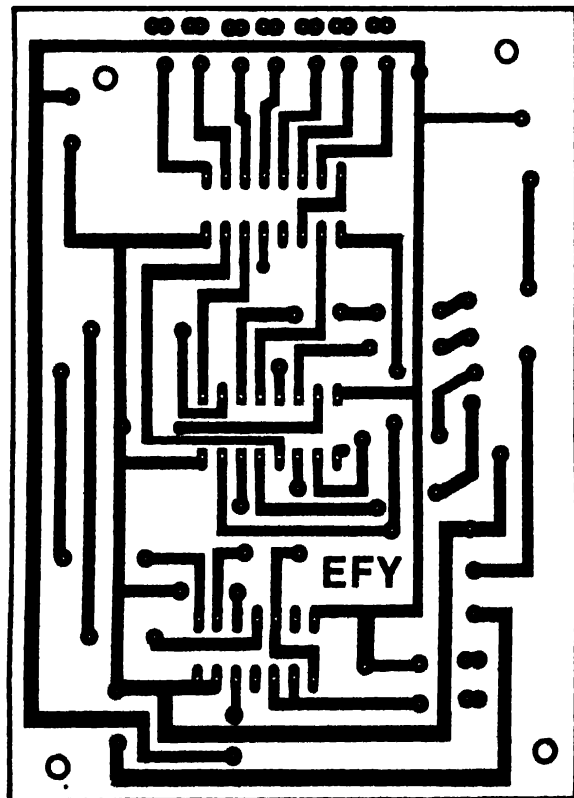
Actual size PCB layout of monitor board for single display operation. To extend the display digit to more than one join two or three boards serially as per the number of digits required.
